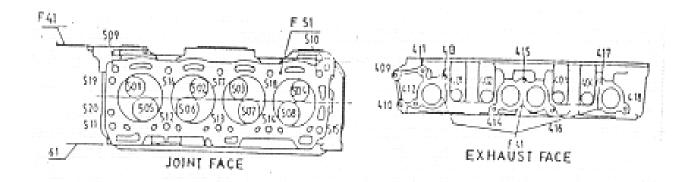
Hole Diagram of a Typical Cylinder Head.
